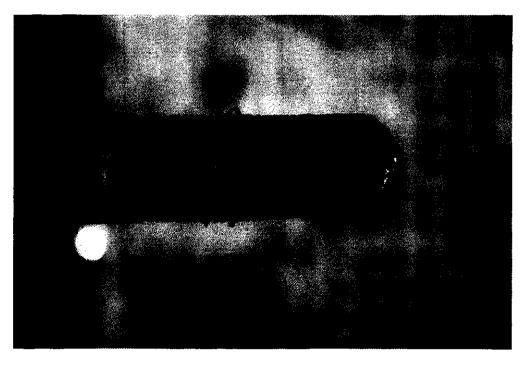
, Close-up view of a stud showing the remnants of thread from the nut still engaged. The heavily corroded end of the stud can also be seen.
